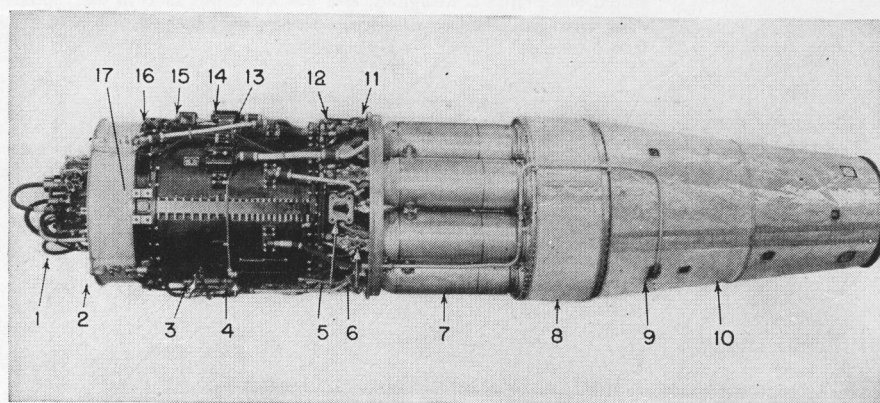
Left side view of TG-180 showing (1) engine accessories; (2) forward air guide; (3) flow divider; (4) ignition transformer; (5) horizontal main mounting trunnion; (6) fuel nozzle connection; (7) combustion chambers; (8) turbine casing assembly; (9) turbine wheel cooling air line; (10) exhaust cone assembly; (11) engine fire-wall baffle; (12) mid-frame; (13) thrust balancing pressure line; (14) bearing cooling air filter; (15) electric junction box; (16) forward frame; (17) horizontal forward mounting trunnion.
